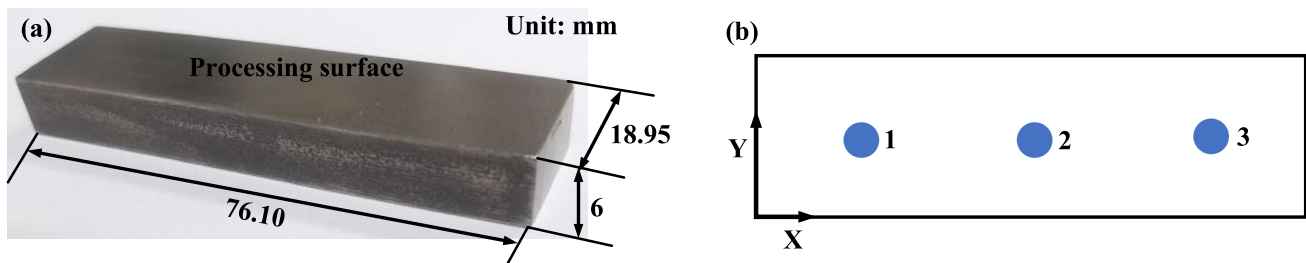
Specimen and measurement points: a block specimen; b planning for measuring residual stress, three measurement points are evenly distributed on the machined surface
